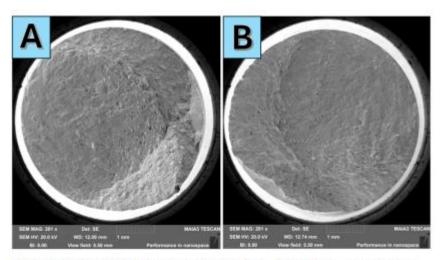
SEM images of a Ti-6Al-4V fatigue specimen from two opposing viewpoints (A and B), showcasing the fracture surfaces from the lower and upper surfaces at different angles.
